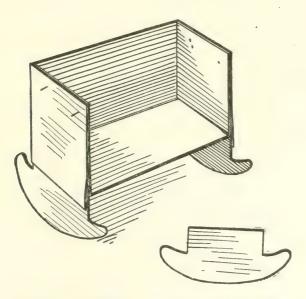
A Rocker Fig. 694. — Detail of Rocker
